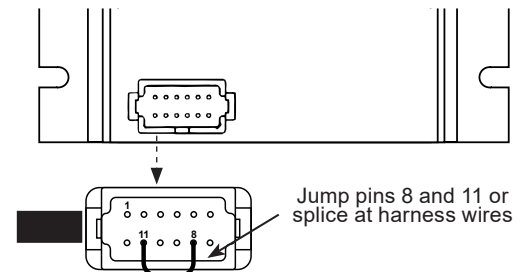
Reuse Existing FLD wire for IGN by Jumping Harness Sockets
